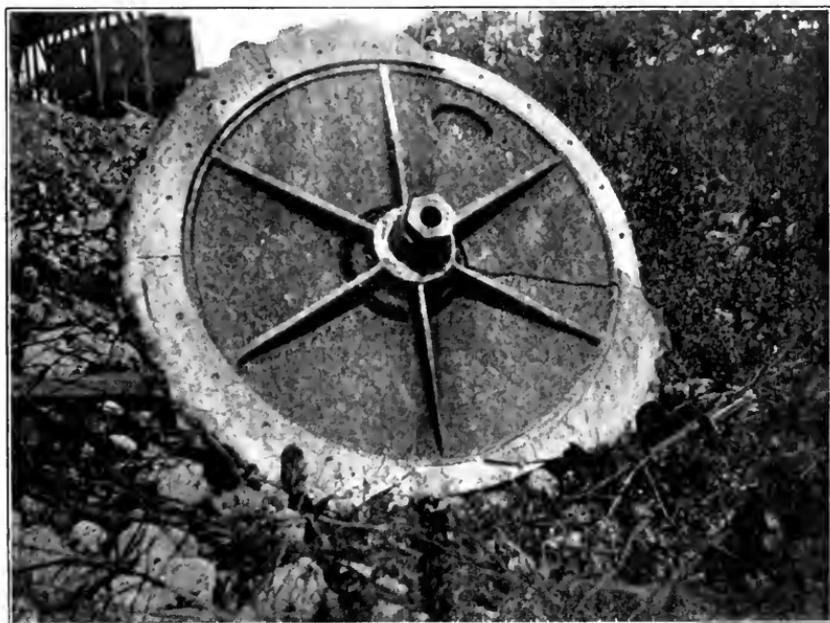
REVERSE SIDE OF OUTER HEAD.
